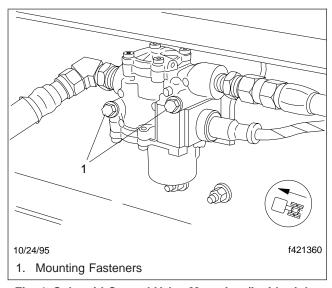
, Solenoid Control Valve Mounting (inside righthand rail mounting shown)
